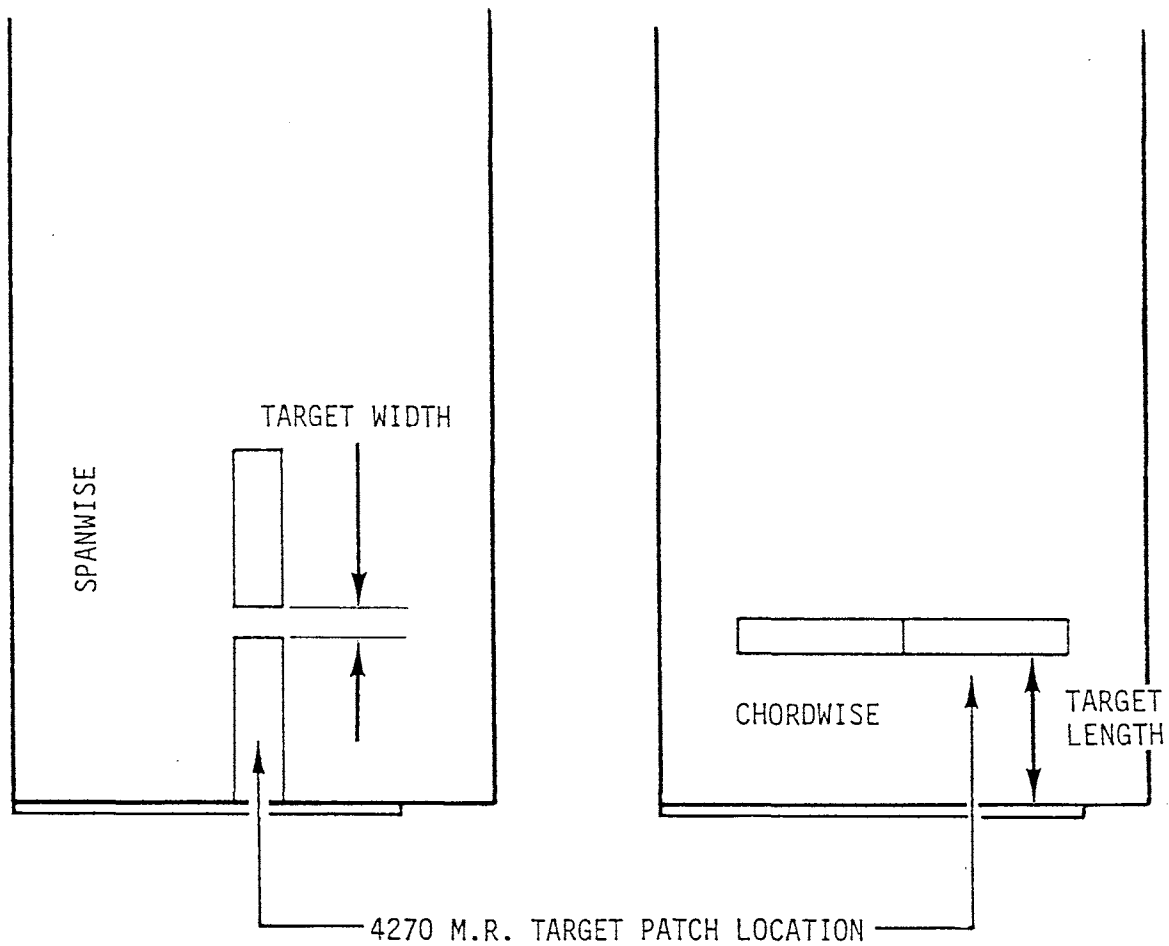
MAIN ROTOR TARGET PATCH LOCATION
